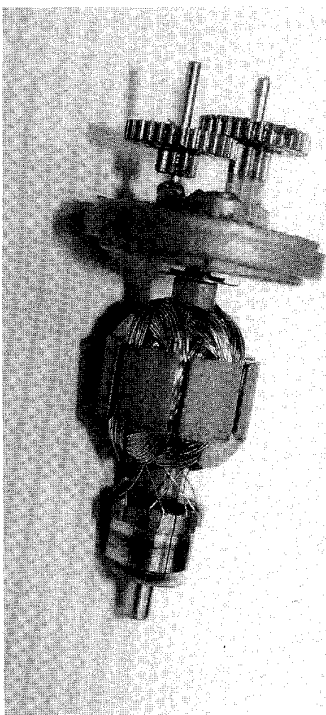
A permanent magnet DC gearhead motor shown here has been removed from its housing. Windings of the armature around a central core with ends connected to commutator segments can be seen at the right, while the geartrain is mounted on the shaft at the left. A cylindrical housing (not shown) fits around the armature and holds two permanent magnets along its inner shell.
